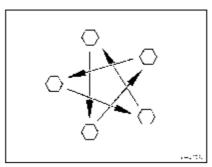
Tighten the wheel nuts or wheel bolts cross-wise
